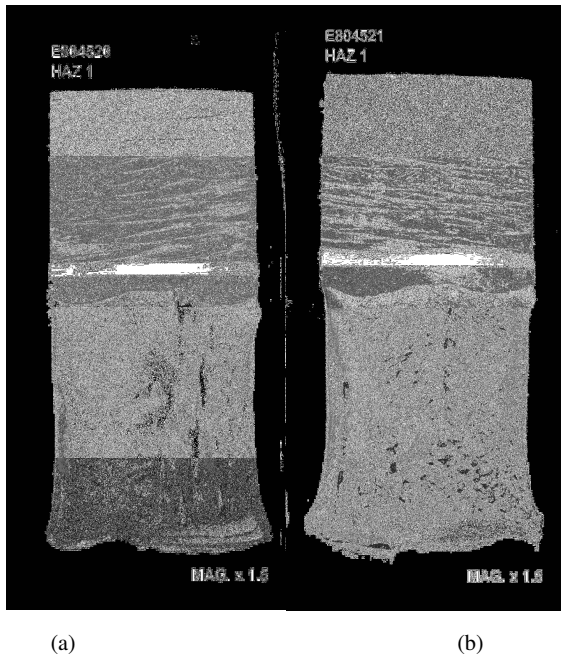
Fracture faces of HAZ CTOD test pieces. (a) TMCP only showing Type II pop-ins in parent plate section of sample (b) TMCP + AC showing no evidence of Type II pop-ins.
